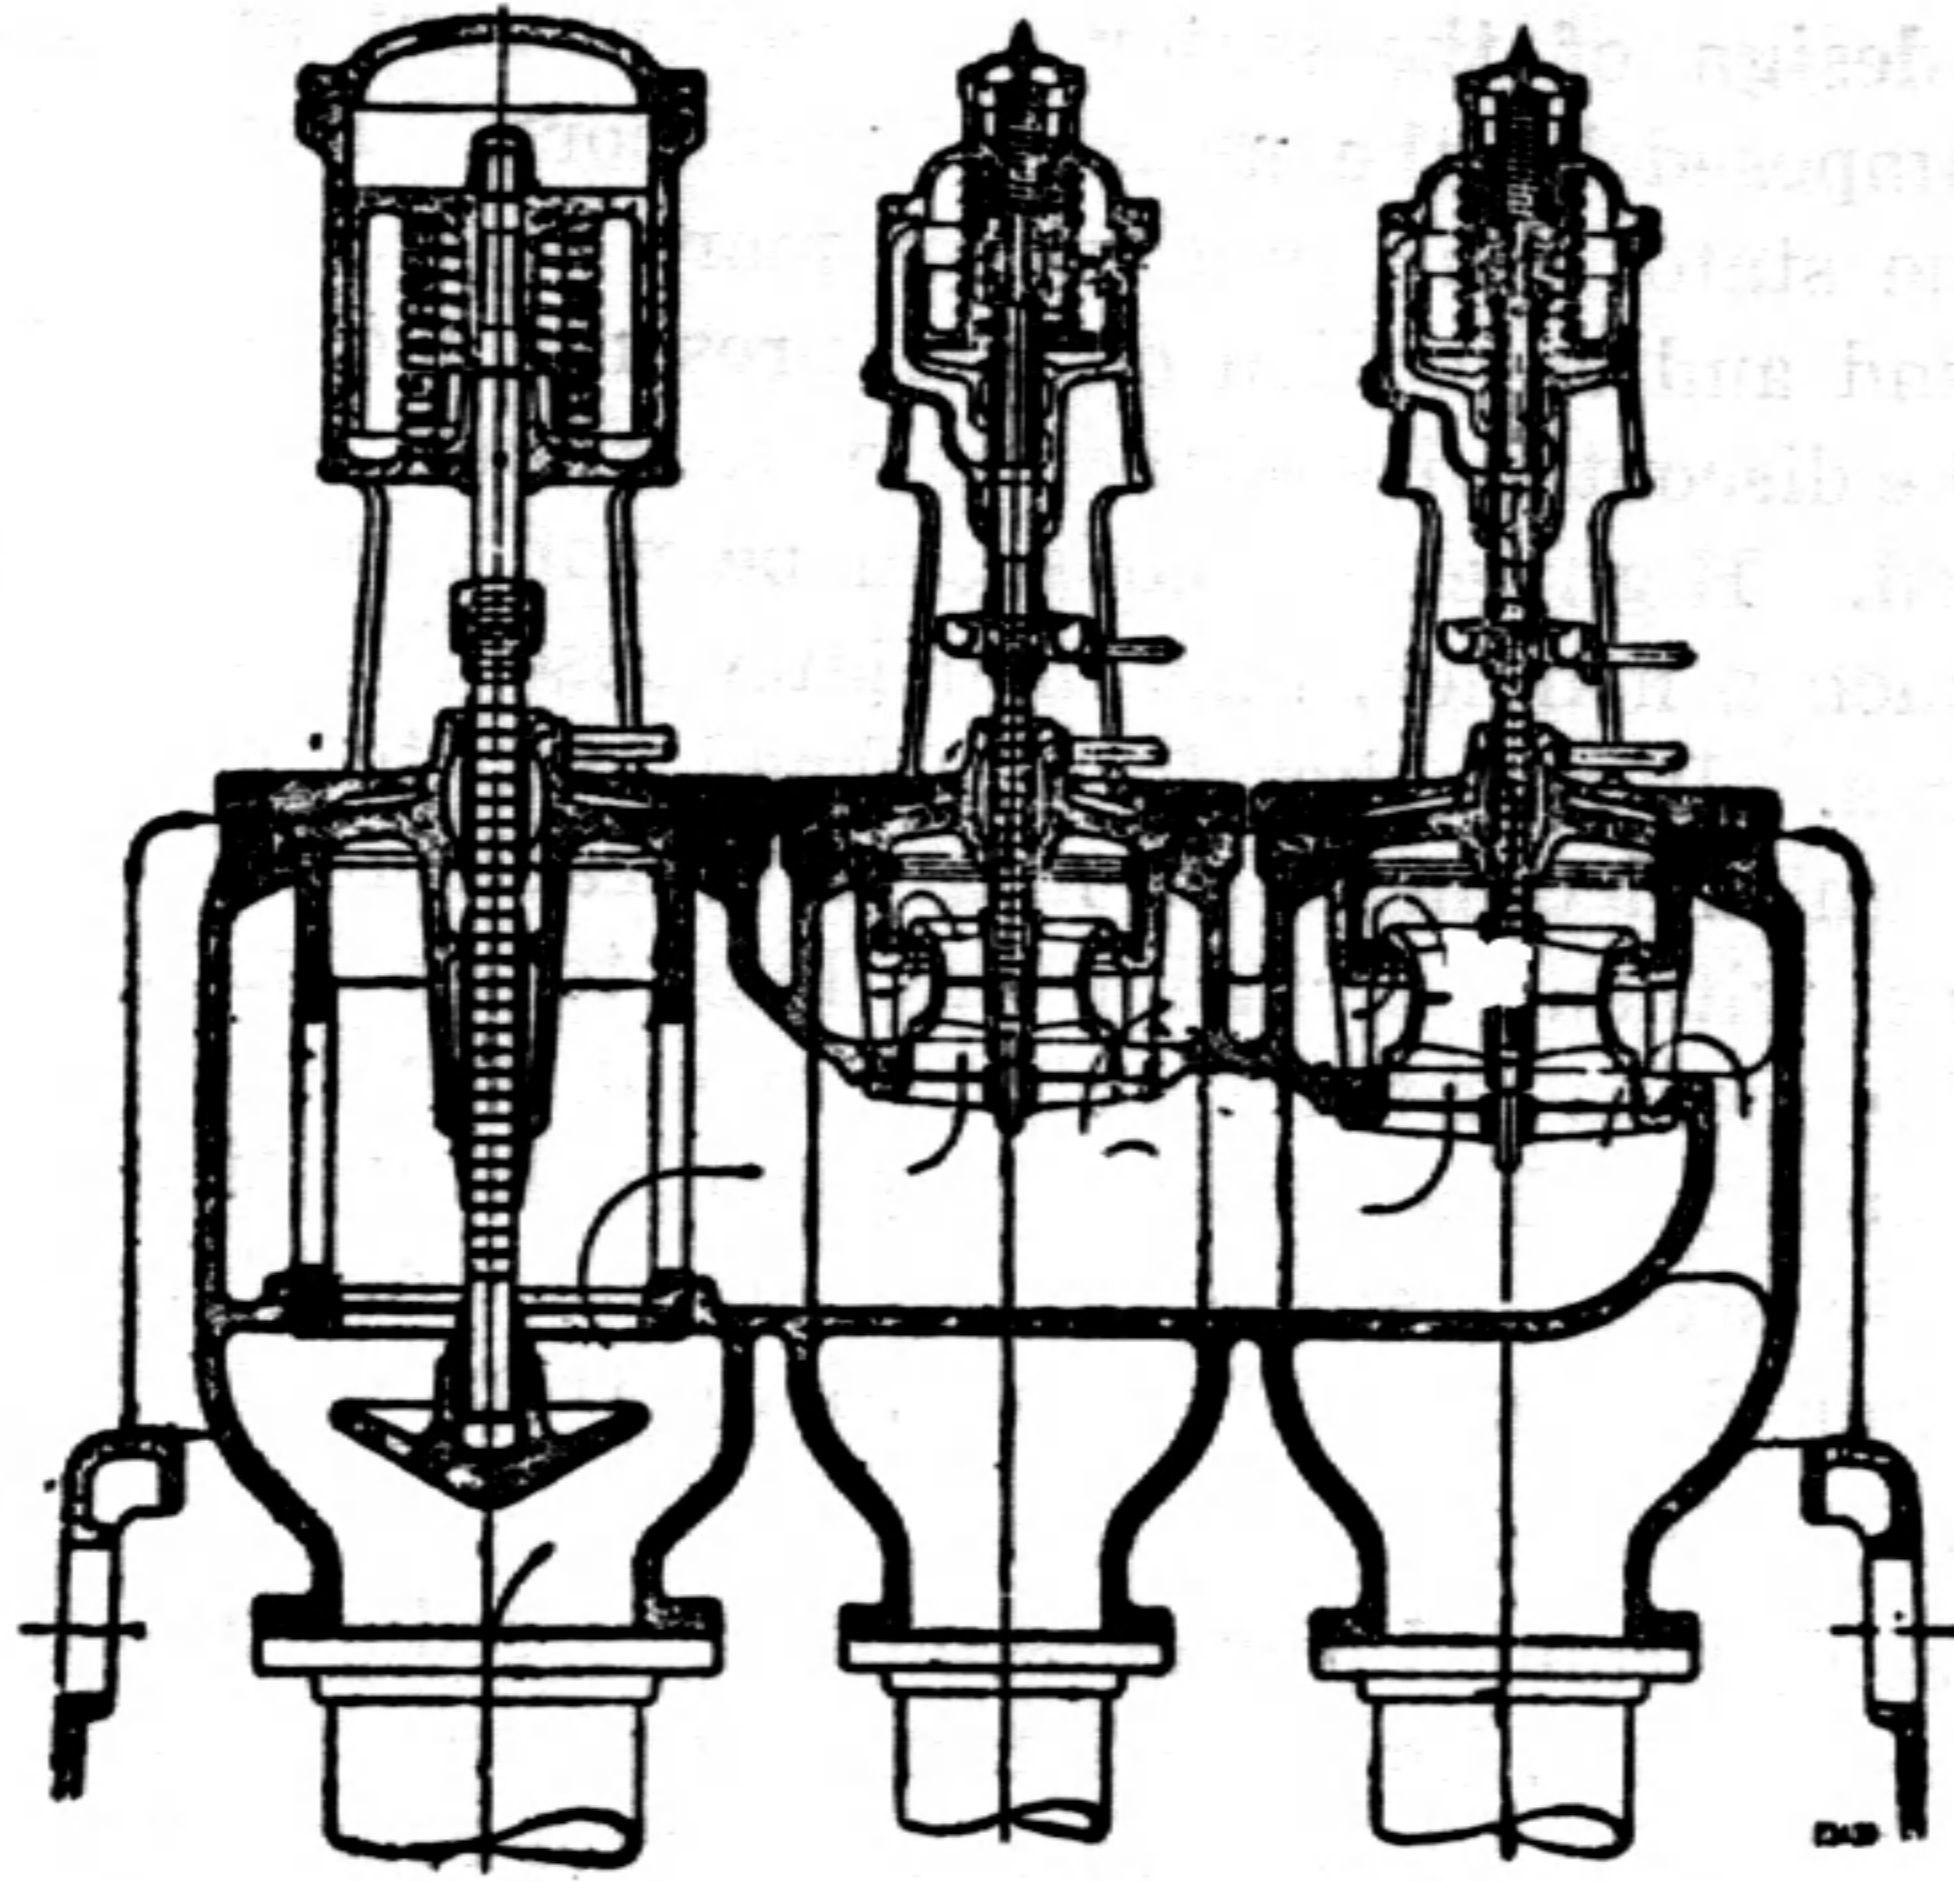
Oil controlled governing gear of Hell-gate turbo-generator showing self-centering fixture of valve cradles.
